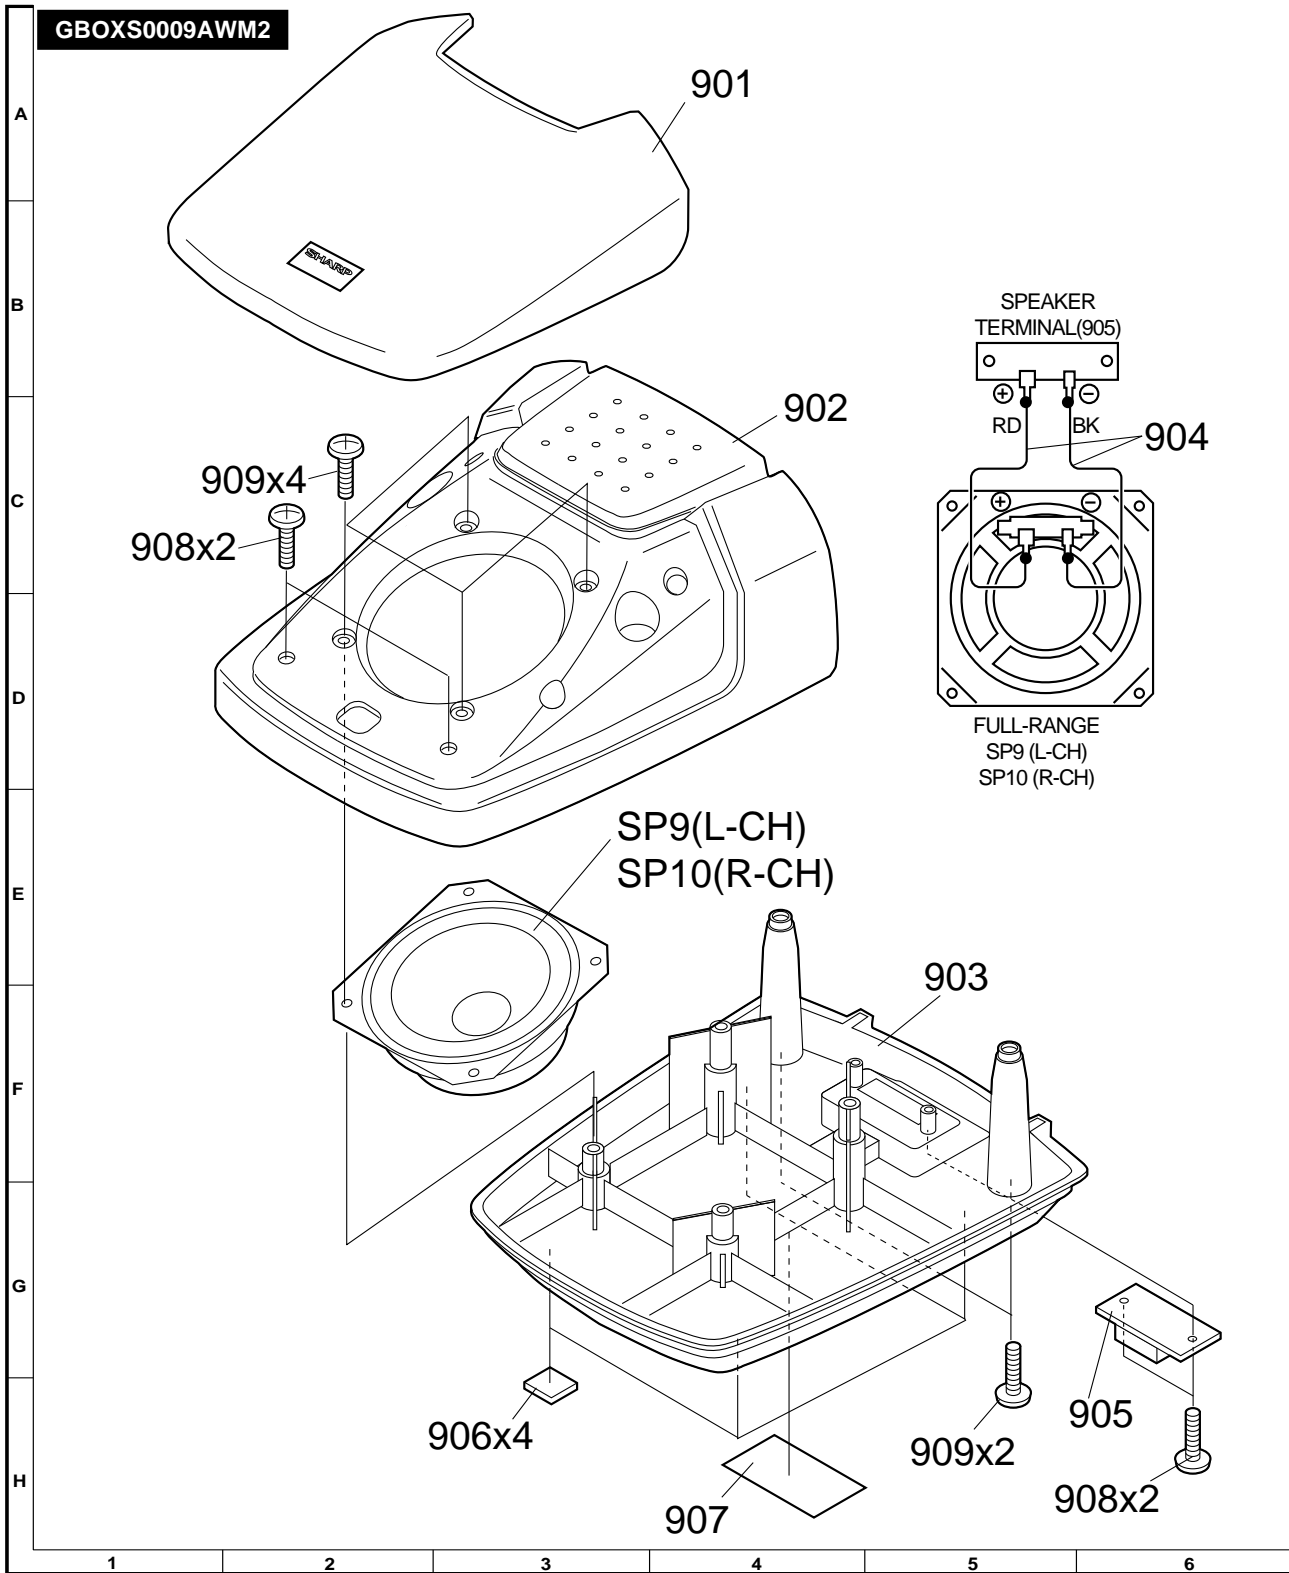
SURROUND SPEAKER EXPLODED VIEW
